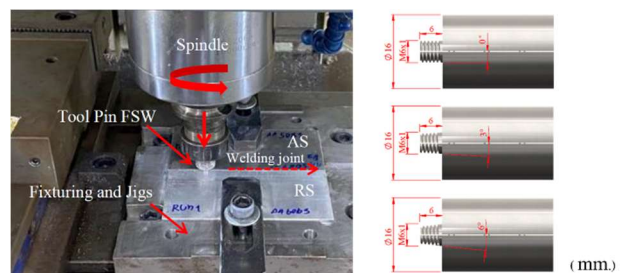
The FSW process: (a) welding and clamping setup, (b) Welding tool
